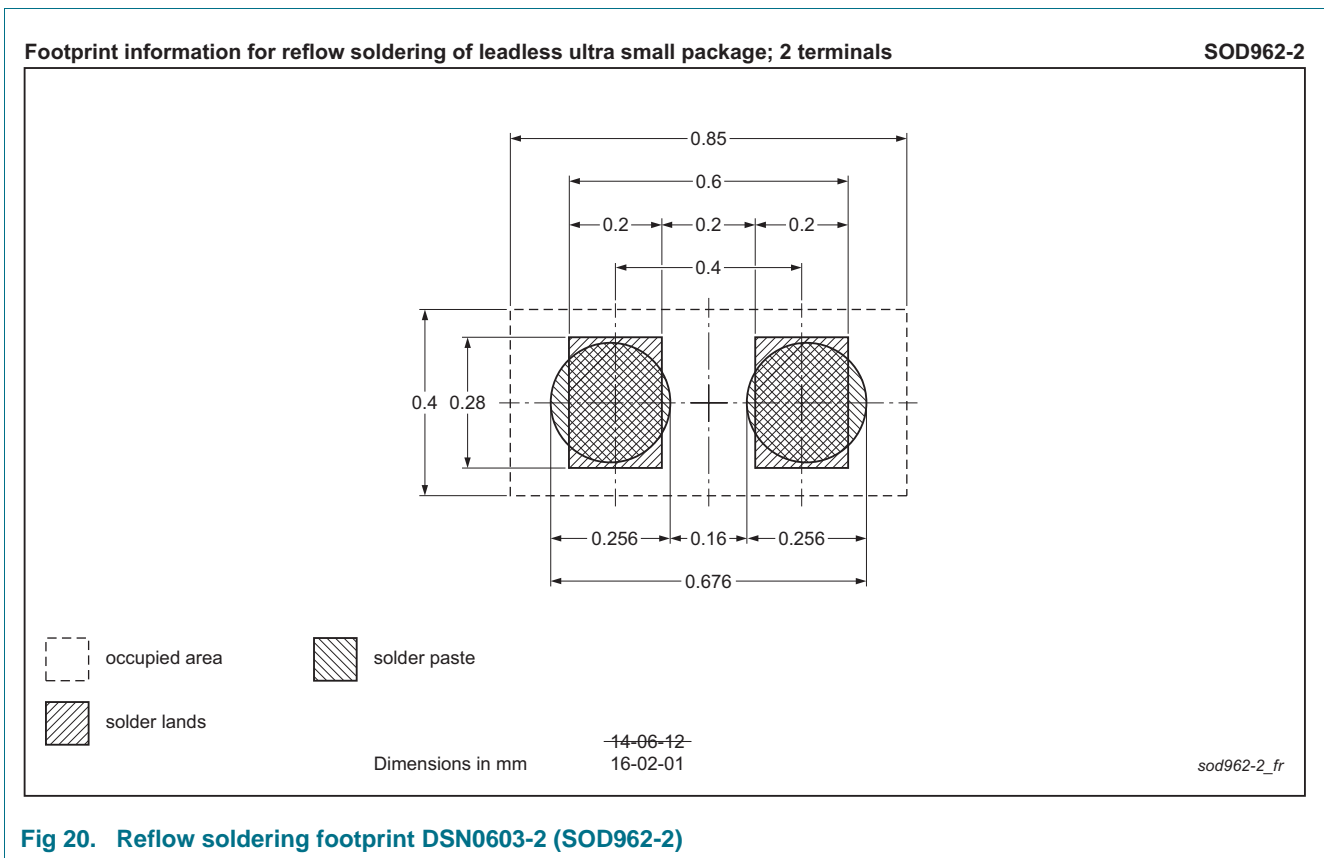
Reflow soldering footprint DSN0603-2 (SOD962-2)
